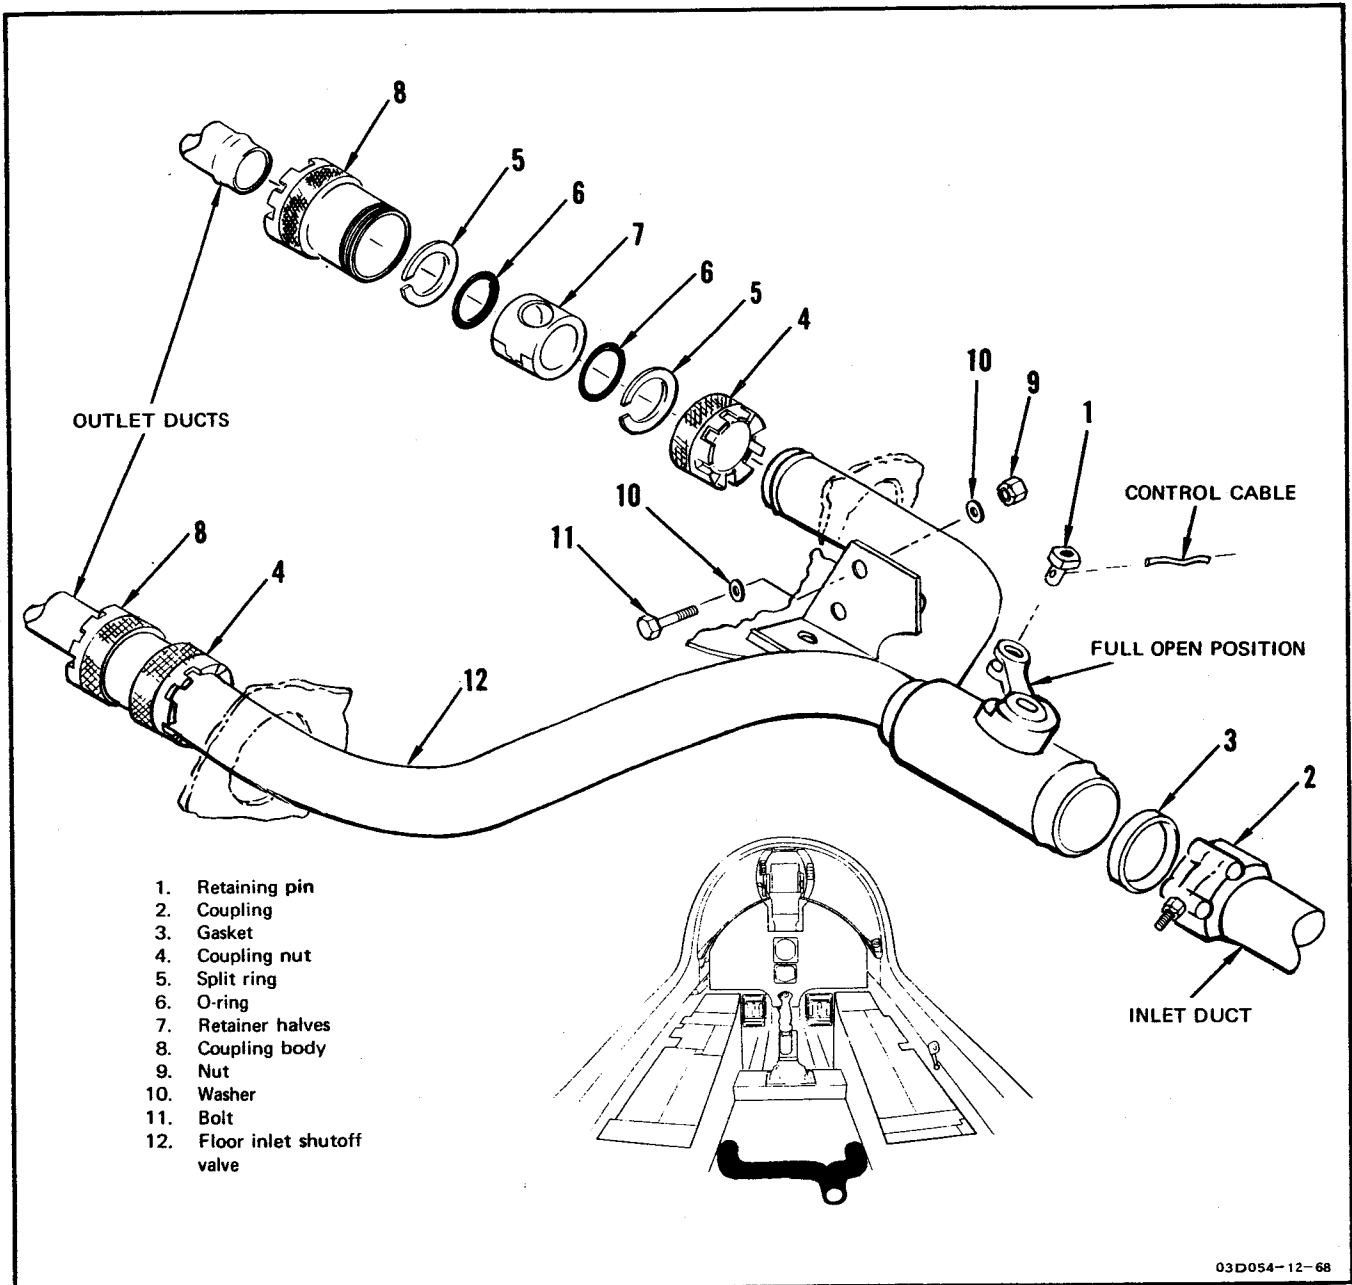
Floor Inlet Shutoff Valve Removal and Installation
